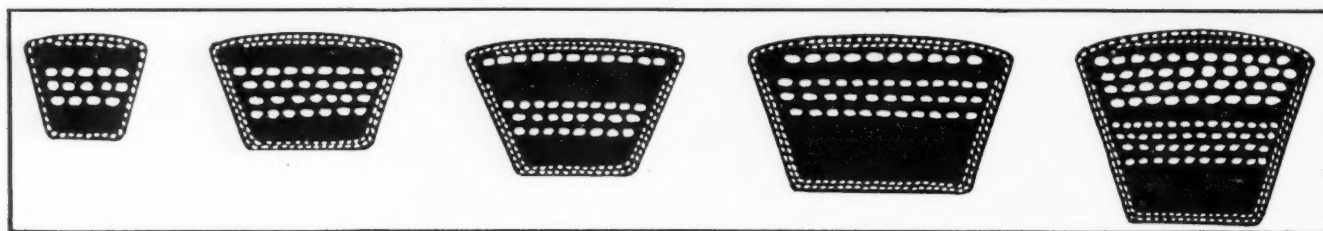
Cross sections of typical Gilmer V-belts showing construction of jacket, cords and breaker strips
